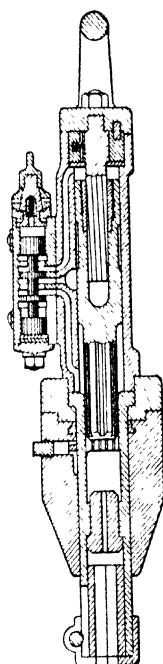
McKiernan-Terry "A-9" Hammer Drill.
